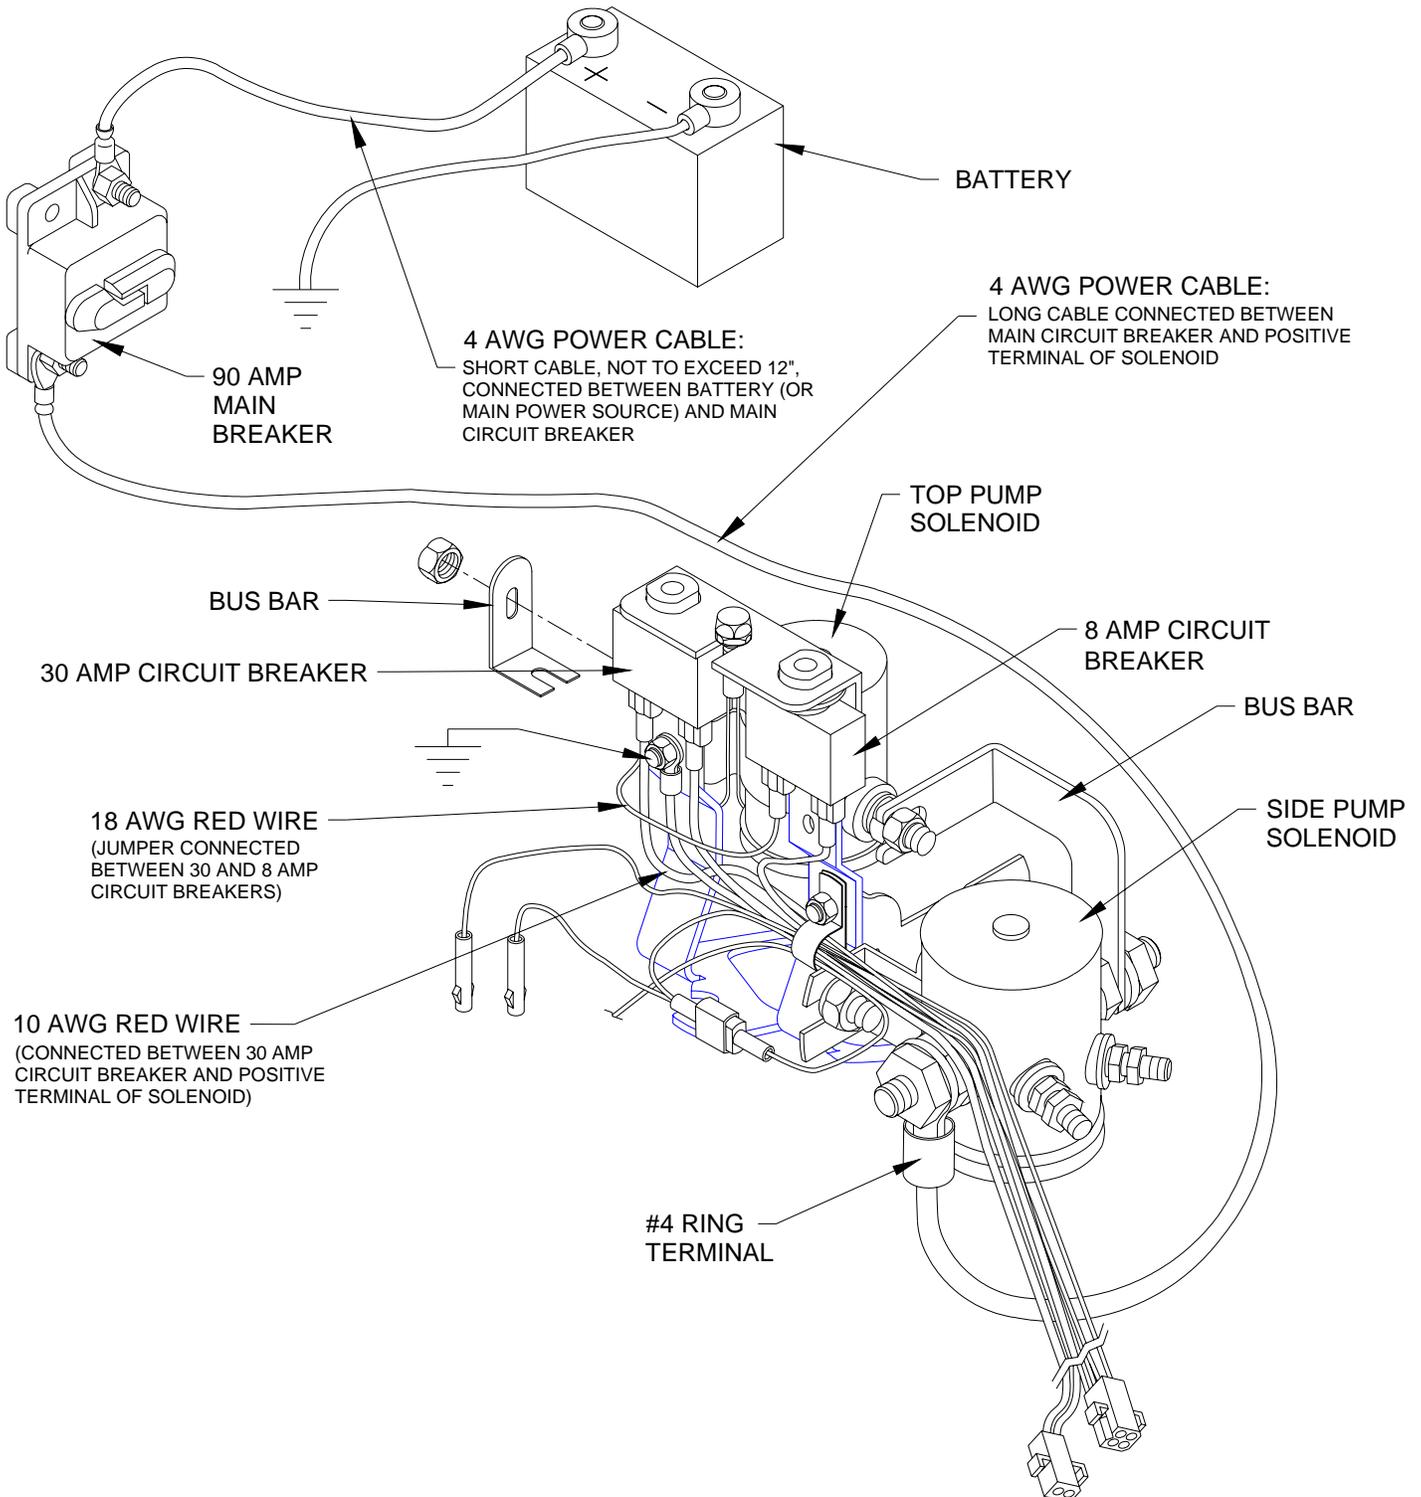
ELECTRICAL INSTALLATION DIAGRAM
